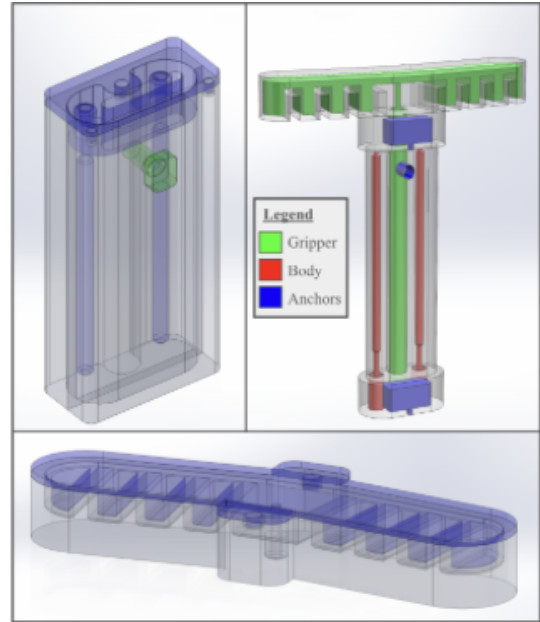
Final Prototype CAD Assembly and Mold Examples
